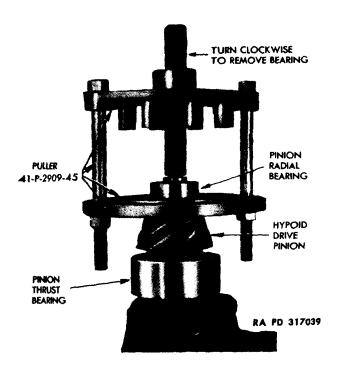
Removing Hypoid Pinion Radial Bearing
